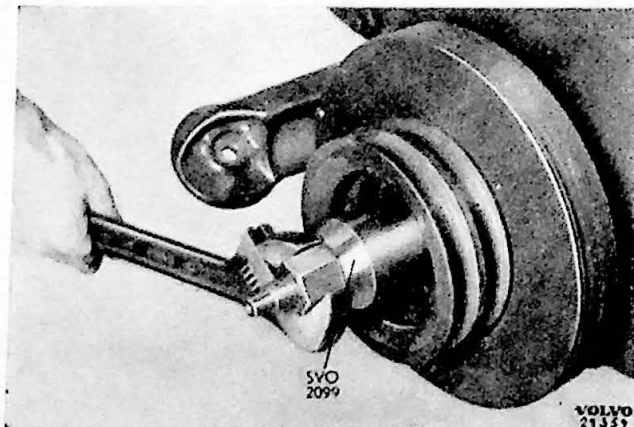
39. Fitting crankshaft pulley and vibration damper.
